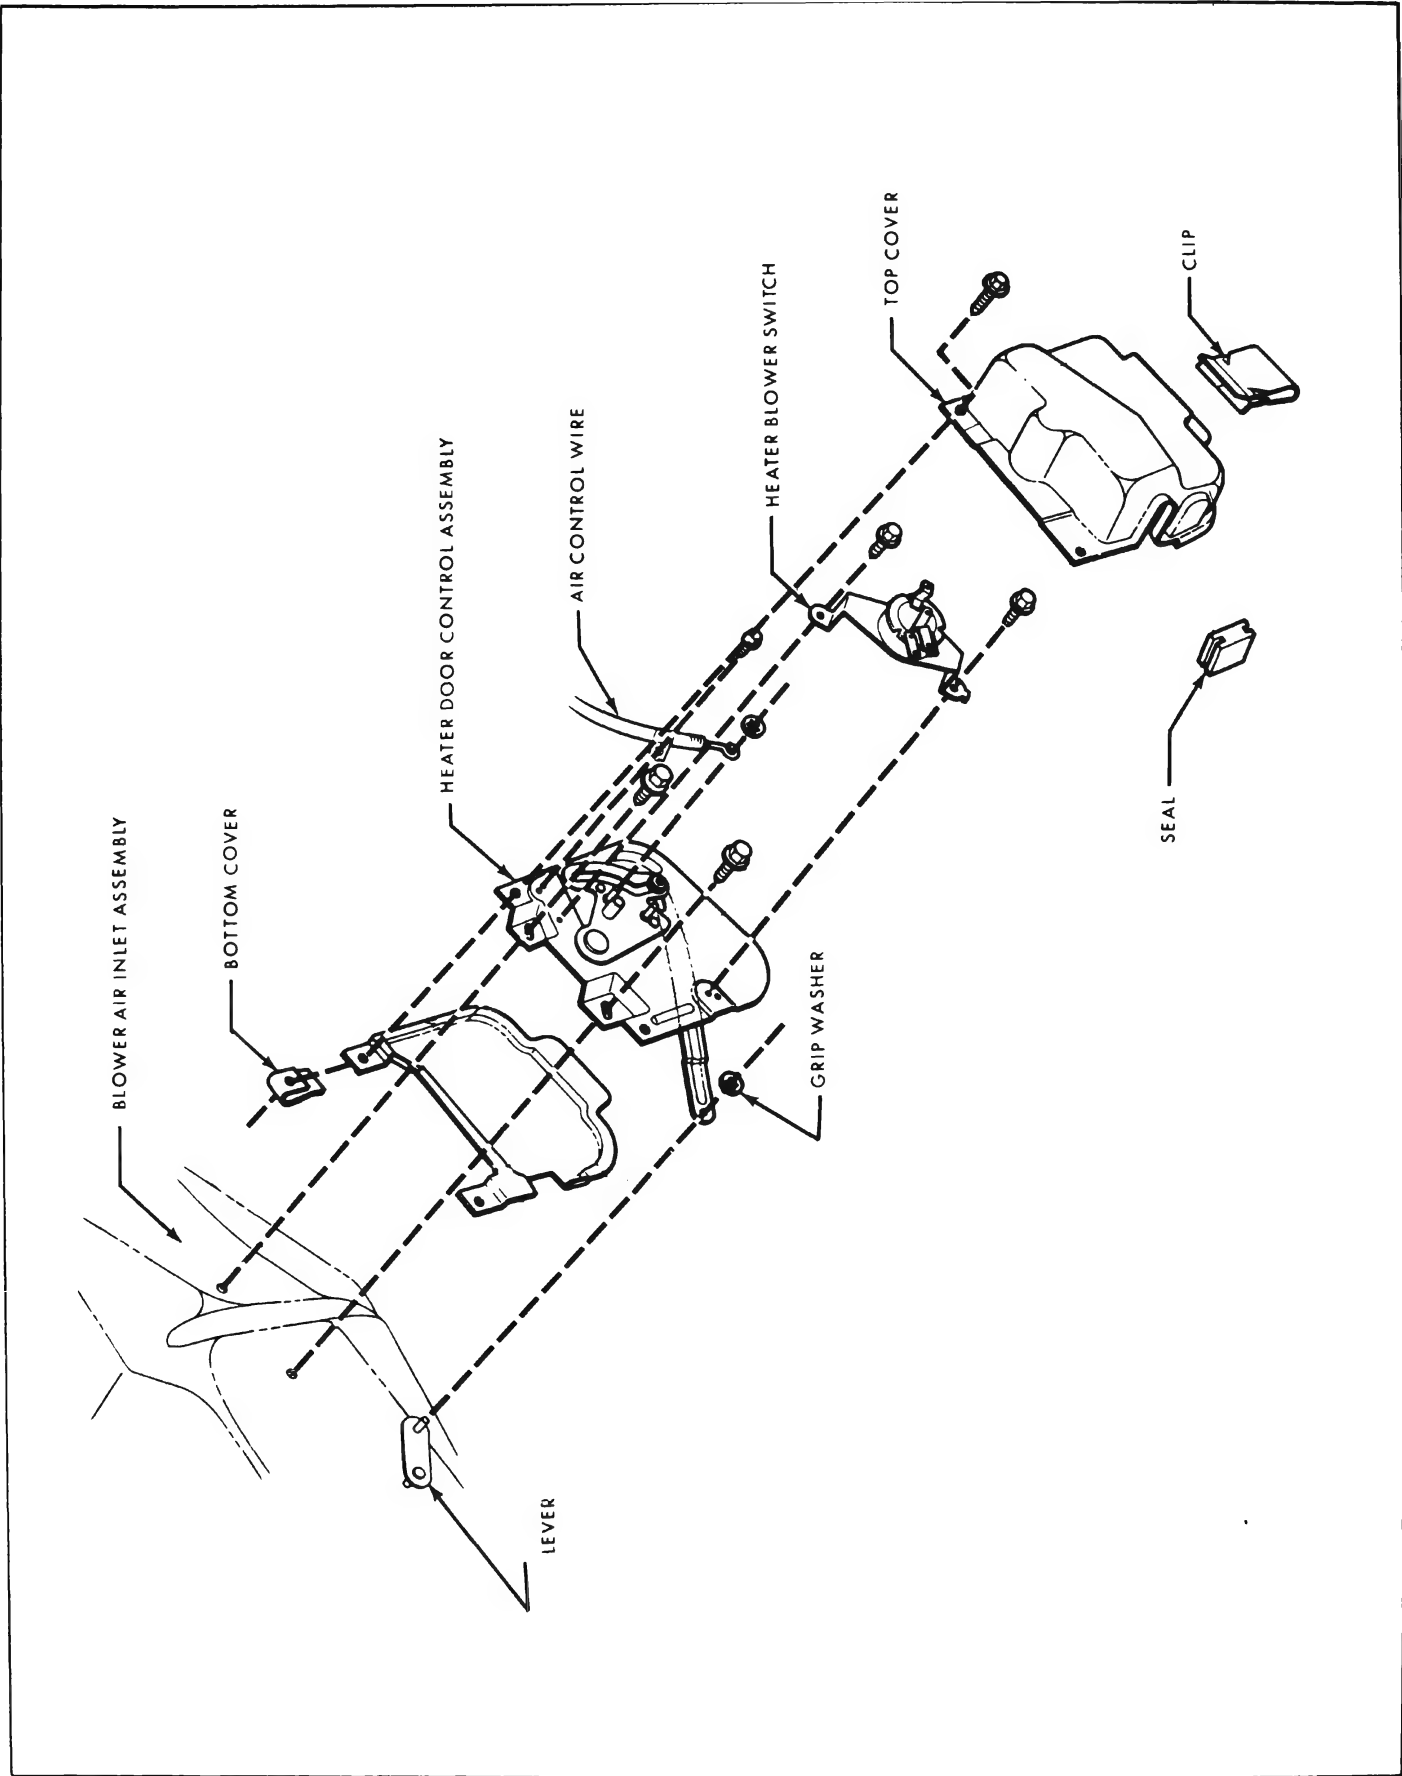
Heater Door Control Assembly - 4400, 4600 and 4800 Series
